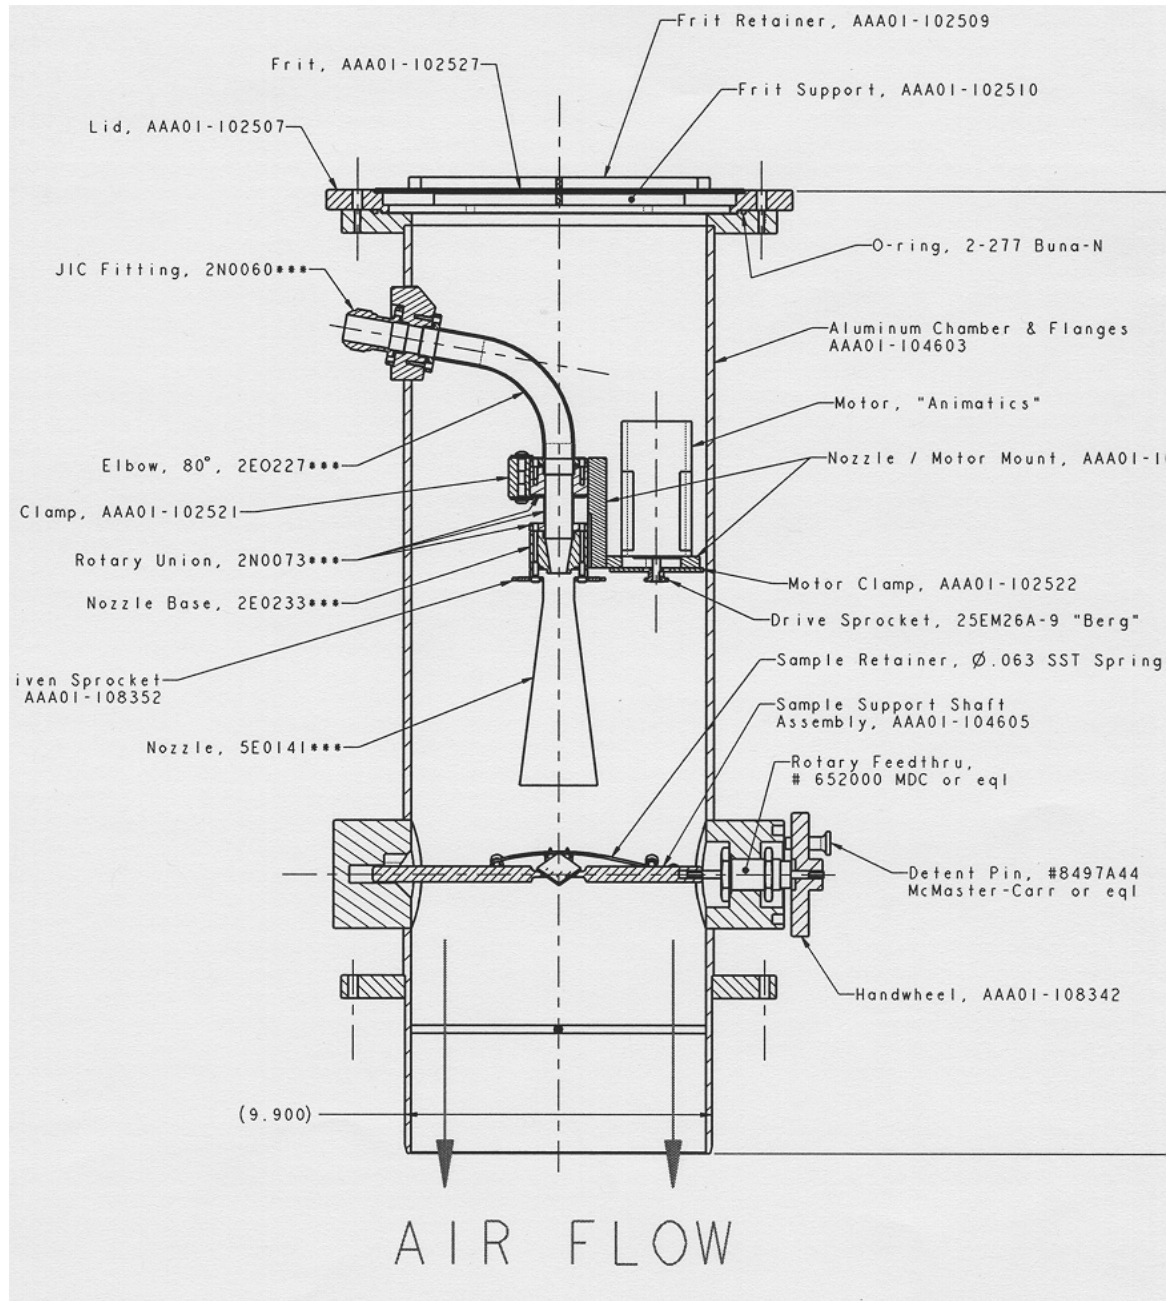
Schematic of the CO₂ cleaning test fixture head.
